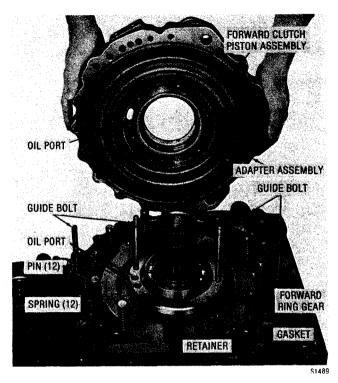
Installing rear housing adapter assembly (TRT-3 underdrive)
